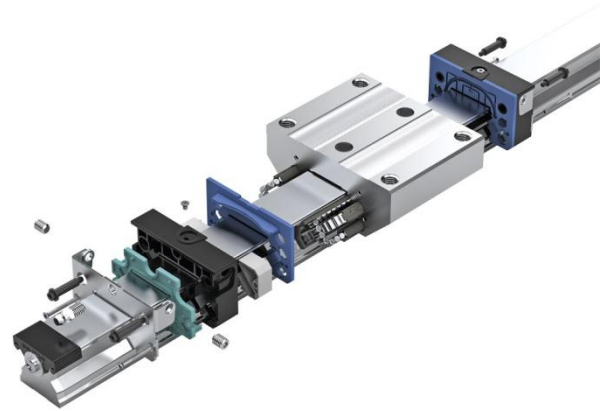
Rolling guideway with profiled track – manufacturer SCHNEEBERGER [4]
